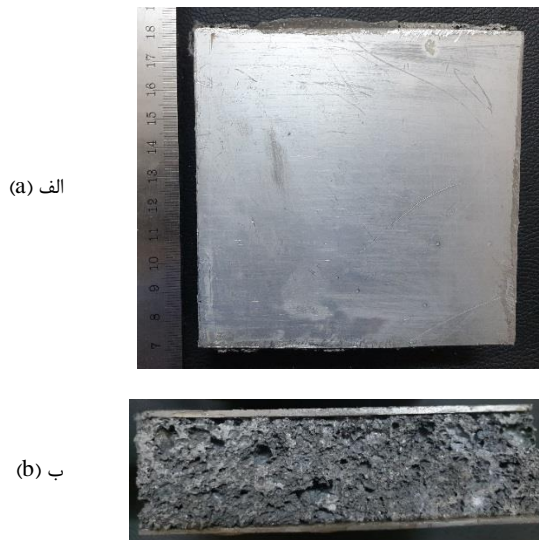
Sample Sandwich Composite Plate with Aluminum Case (a) Front View (b) Side View
